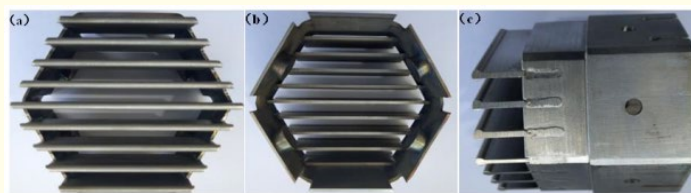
The physical drawing of the grid frame component: (a) The front; (b) The back; (c) The side.
